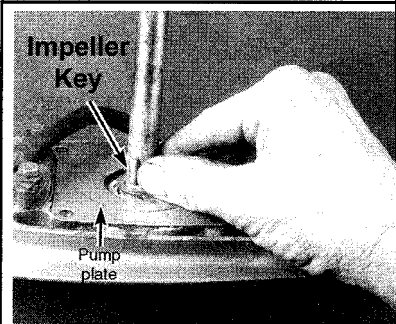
Use a dab of grease to hold the impeller drive pin in position ...
